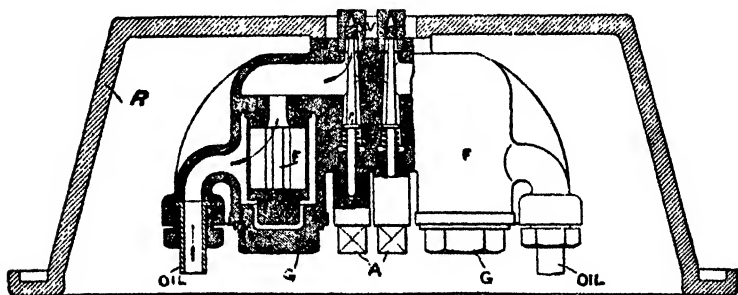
Schutte-Körting twin-nozzle pressure-jet burner.
